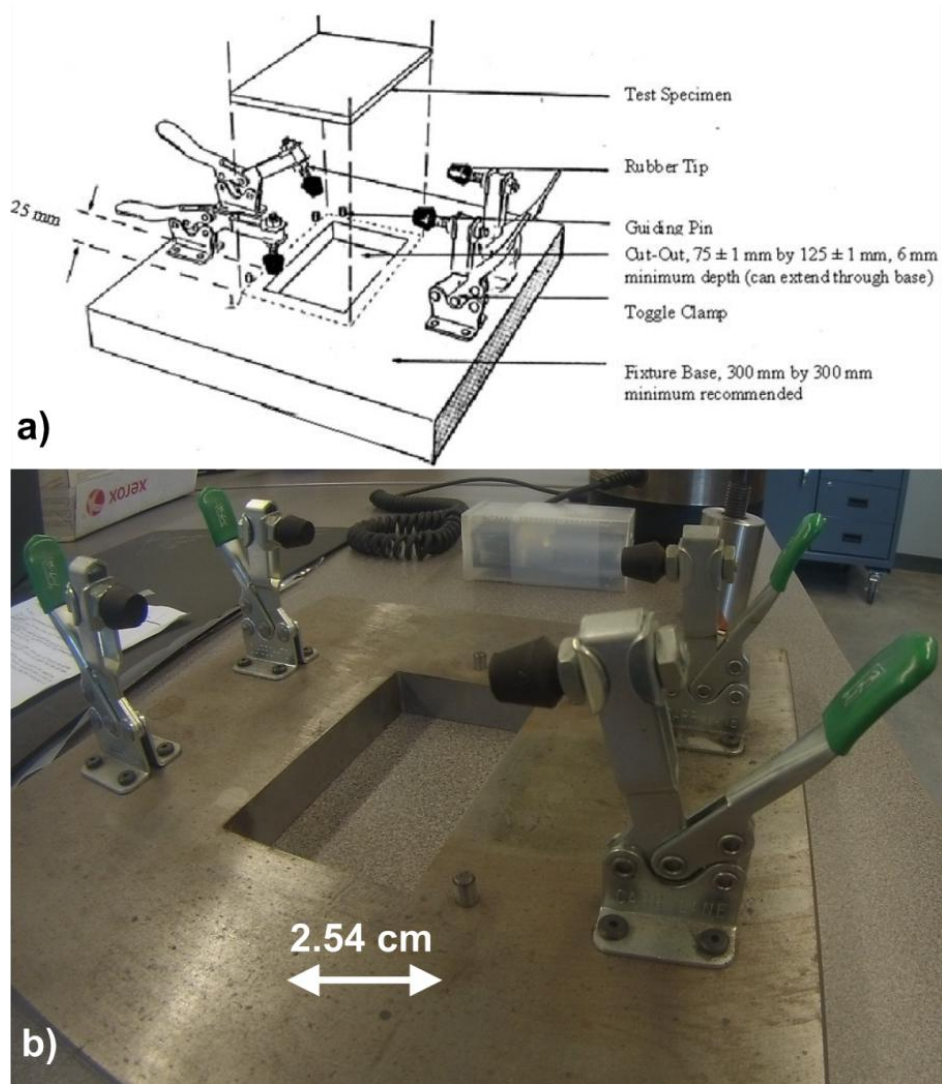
(a)ASTM D7136 specification diagram of the clamping mechanism.
